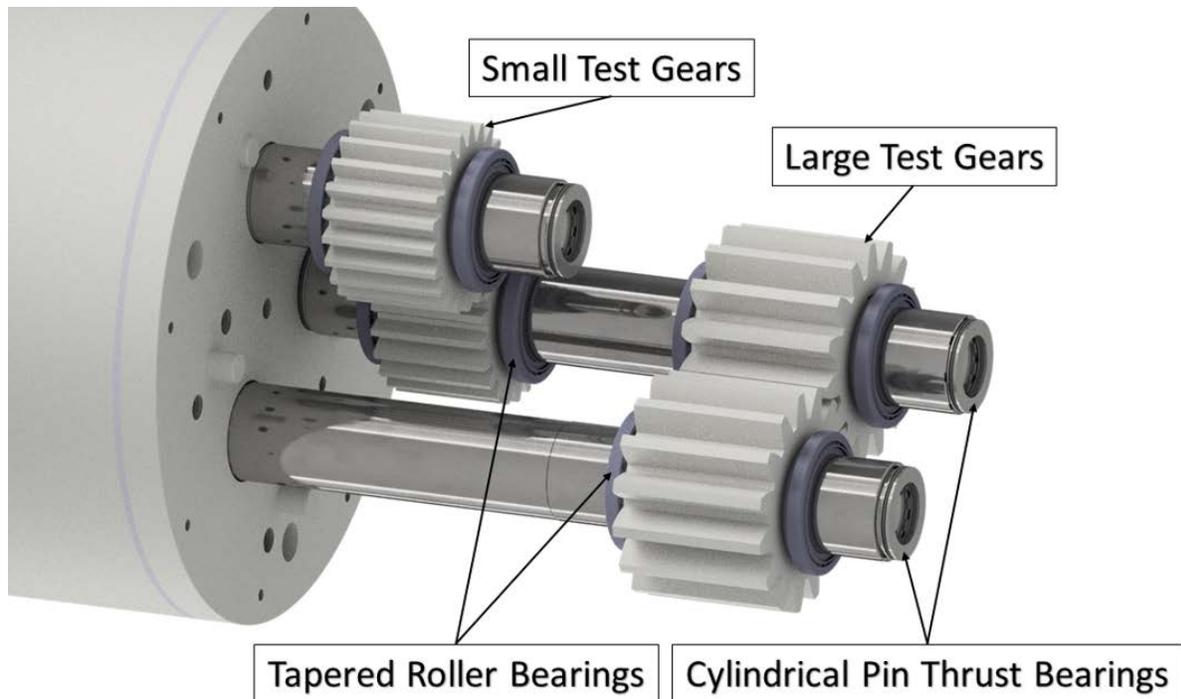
Overview of the submerged mechanical components tested in the GTA.
